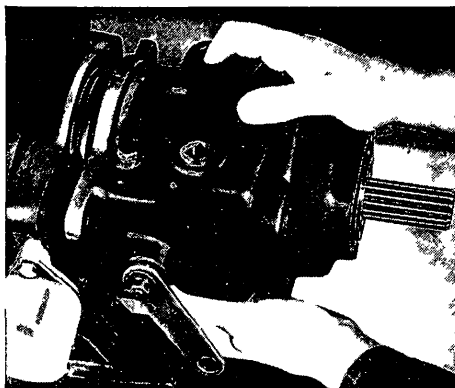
In removing housing line up free wheel shifter case with finger to release it. Tap end of overdrive shaft lightly to prevent it from coming off with housing
